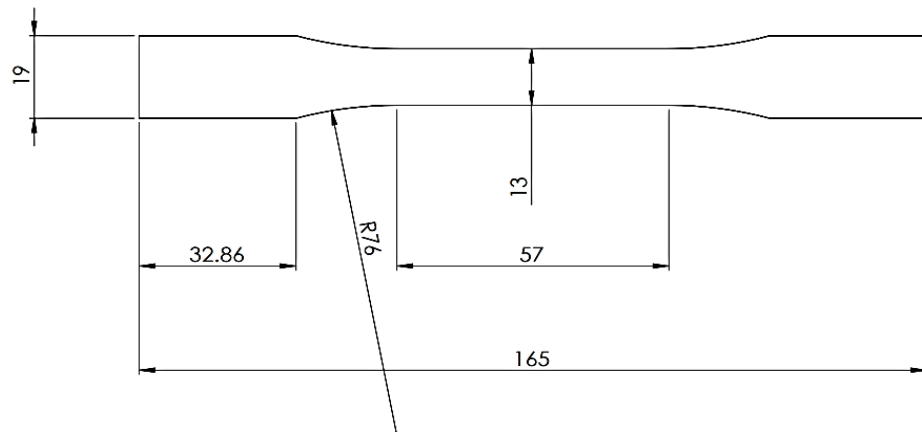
ASTM D638 Sheet Plastic Specimen Dimension
